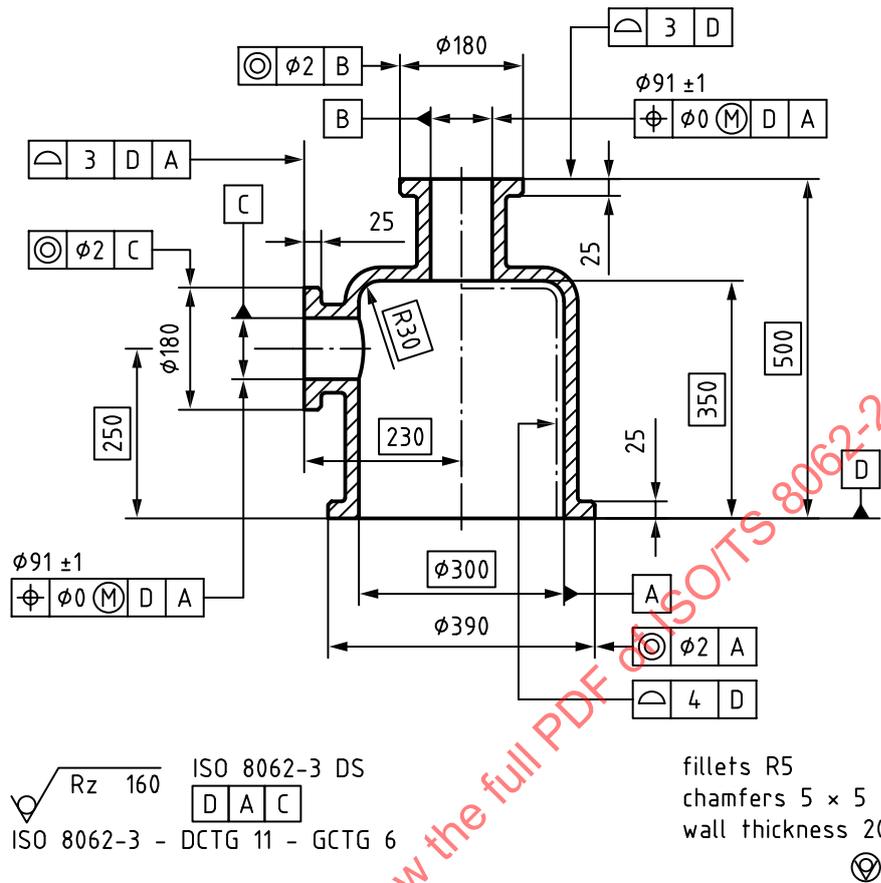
Final moulded part, general tolerances ISO 8062-3 and individual tolerances
